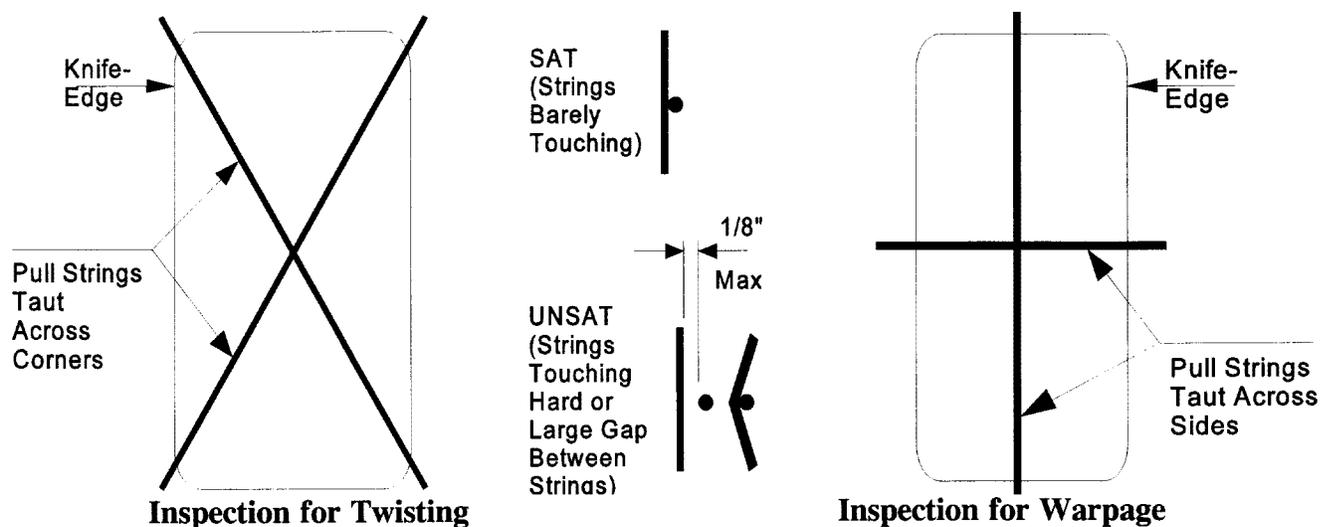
Knife-Edge Inspection for Warpage
